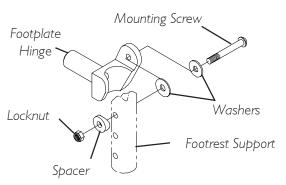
INSTALLING ADJUSTABLE ANGLE FLIP-UP FOOTPLATE HINGE
